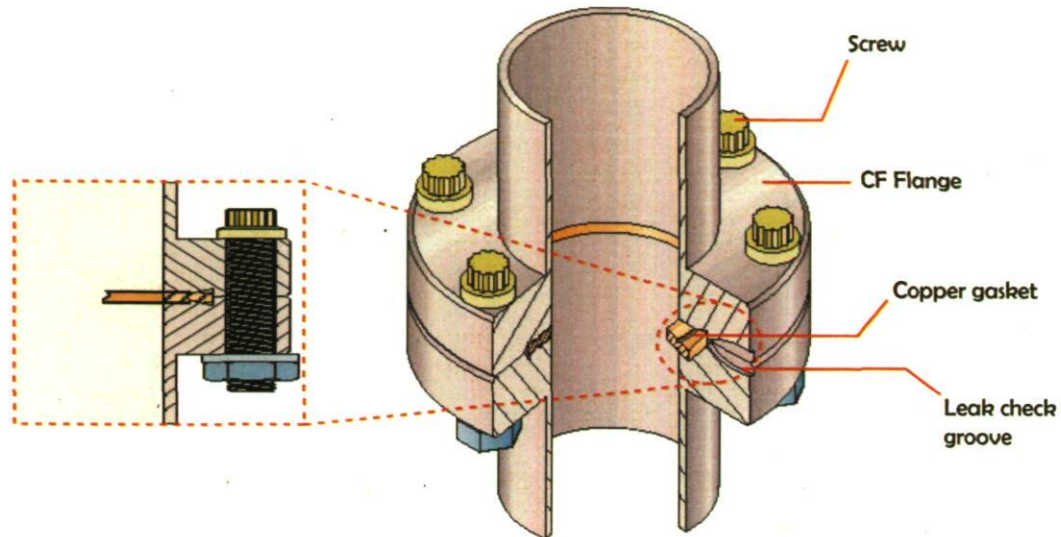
Cross-section of a pair of *Conflat* flanges used in UHV equipment. The seal is made by bolting together two identical flanges with a flat metal ring gasket between the knife edges. The knife edges press annular grooves in each side of the copper gasket, filling all voids and defects and producing a leak-tight seal.
